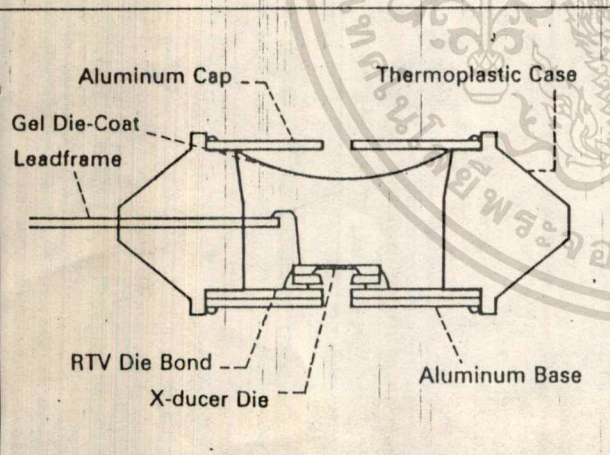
Motorola X-ducer Pressure Sensor Package
